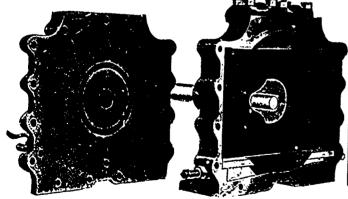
Dake Engine, Showing Piston with Cylinder Cover Removed.
